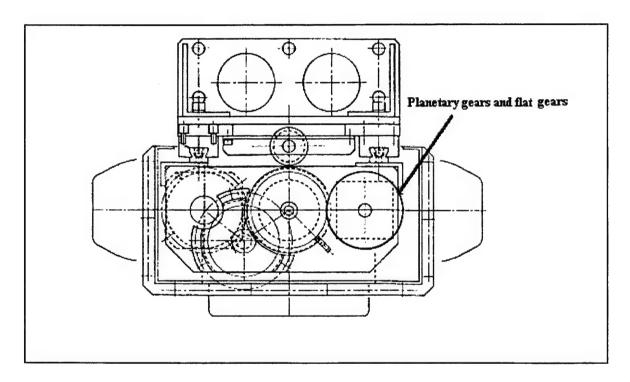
Flat gears in the wheel assembly (transparent view from the top)
